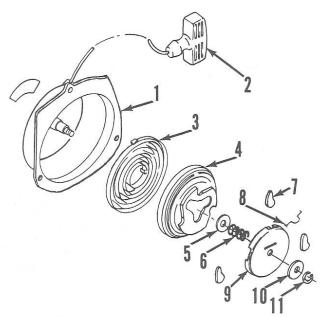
Exploded view of manual starter assembly used on early KLT models. Later type manual starter is similar with the exception of using a single drive pawl assembly.
